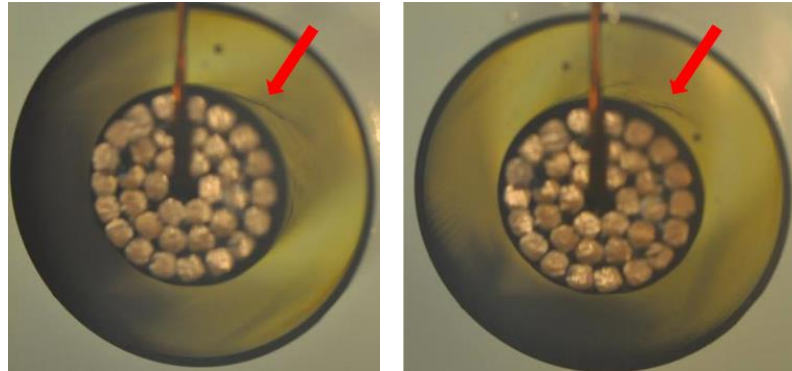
Conductor Shield Defect in a Hot Oil Test
